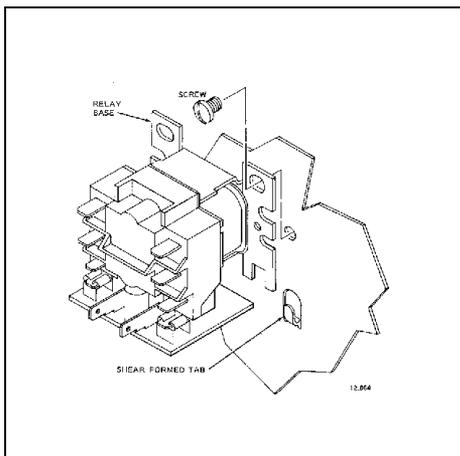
Mounting relay on panel with shear-formed tab and one screw.
